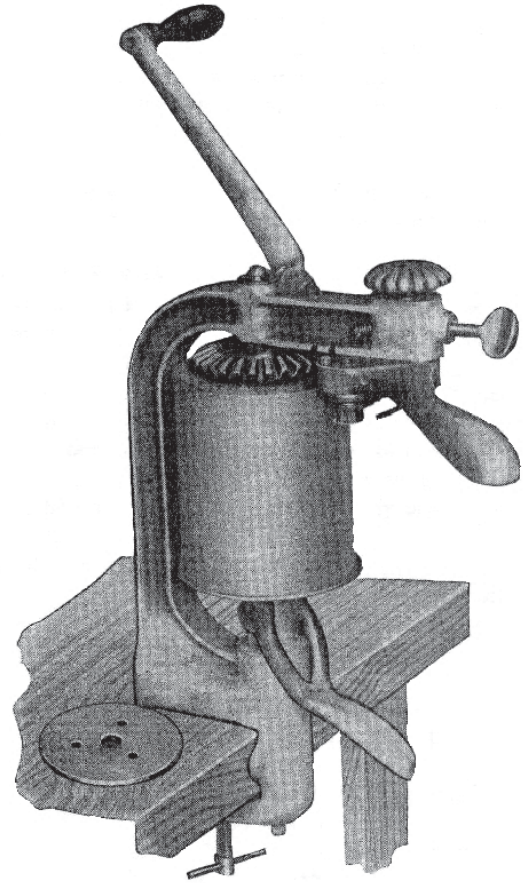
Example of hand-soldering machine (Malcolm 1917).
